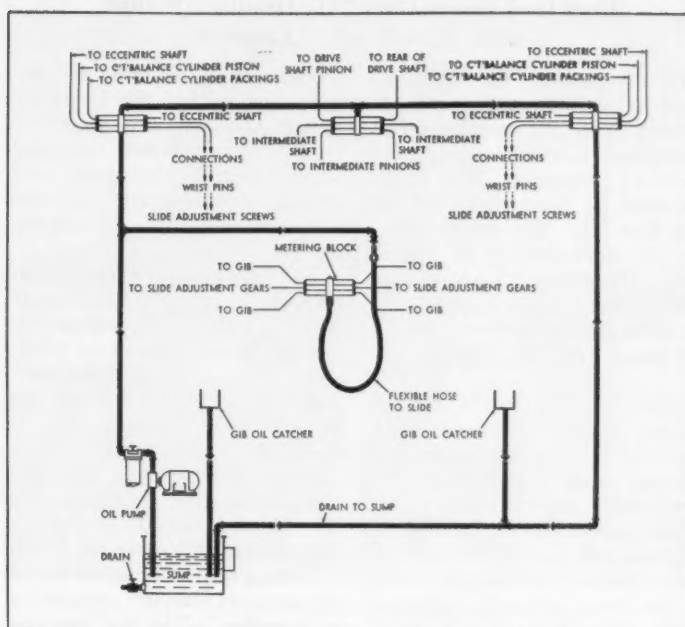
Cut-away view of Clearing straight-side press showing "Clear-Flo" lubrication system
